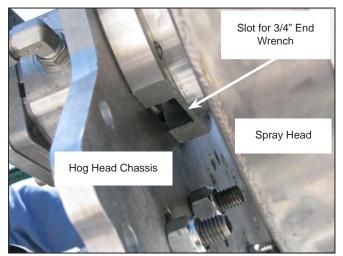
Location of slot in thru-shaft motor mounted on hog head for 3/4" open end wrench.
